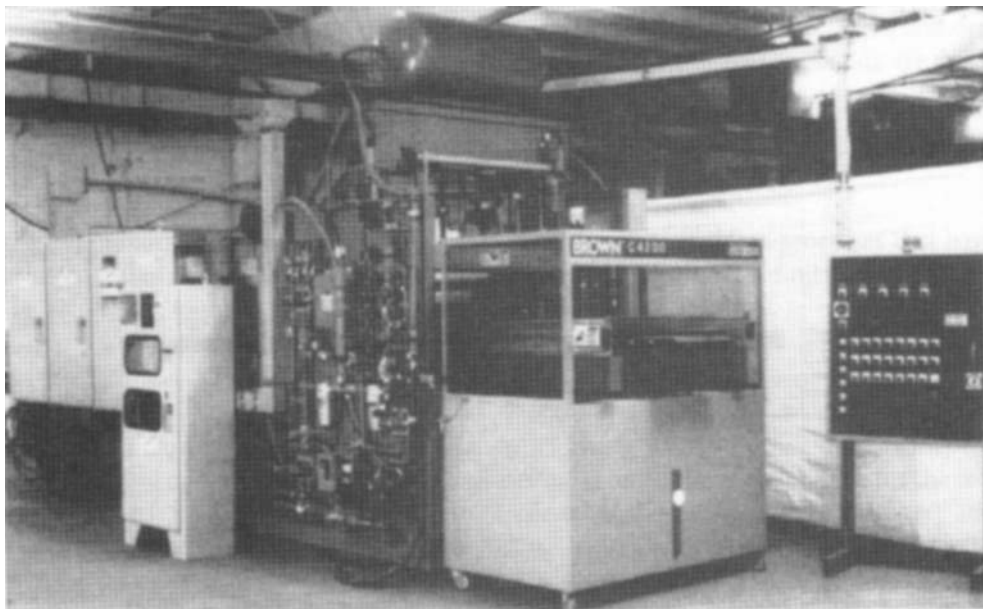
Single-station thermoforming machine (Courtesy: Brown Machine)
